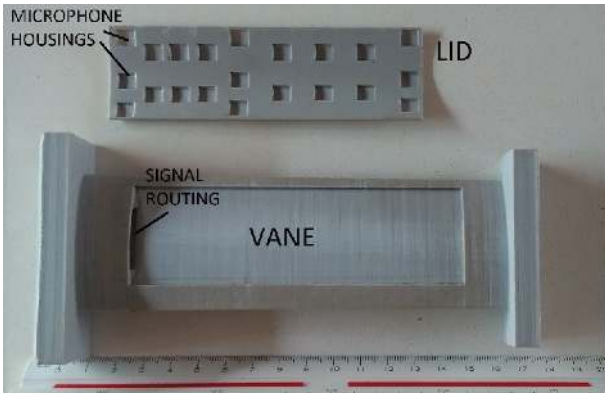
Manufactured parts of the stator vane using FDM (fused deposition modeling) 3D printing.
